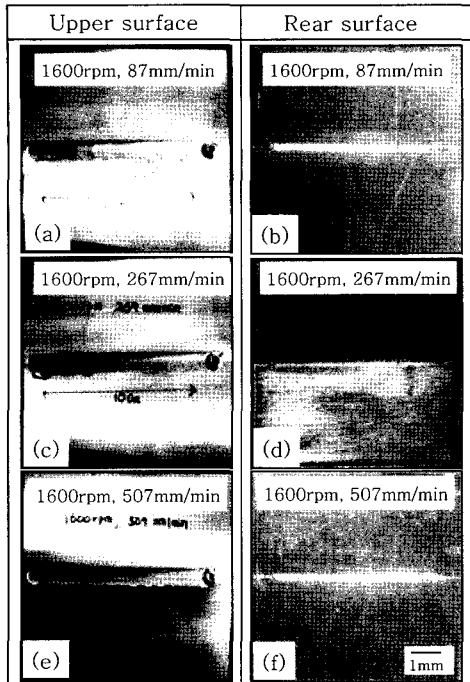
Photos of the top and rear surface of as welded specimens. (a) and (b) 87mm/min, (c) and (d) 267mm/min, (e) and (f) 507mm/min
